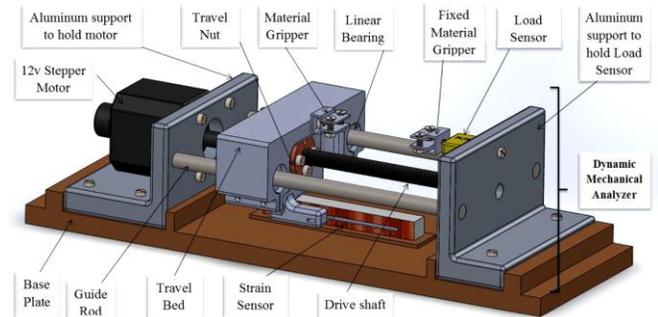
SolidWork Assembly of CAD Model for designed DMA system.
